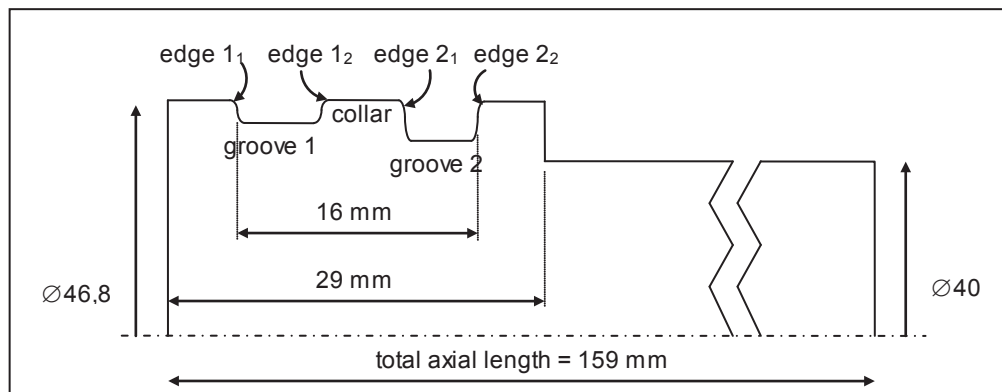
Nomenclature and most important dimensions of the internal workpiece
